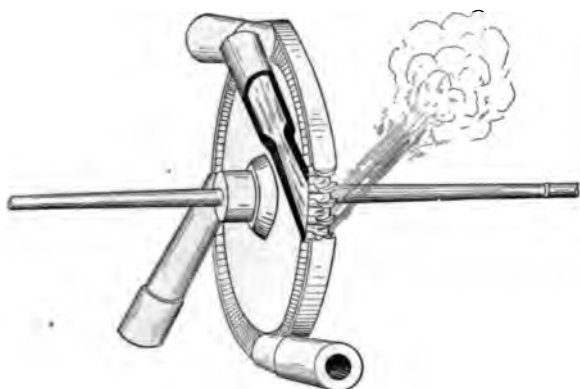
De Laval Wheel, Flexible Shaft and Nozzles.
